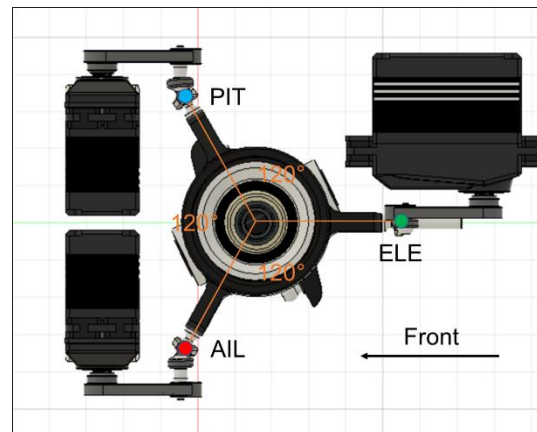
Bottom view of the swashplate mechanism and servo motor setup.
